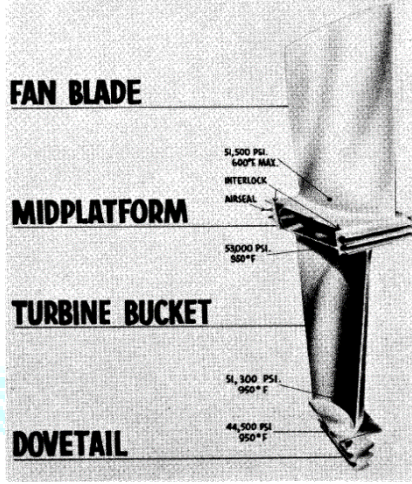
CJ805-21 COMBINATION BLADE AND BUCKET - "BUCKET"
